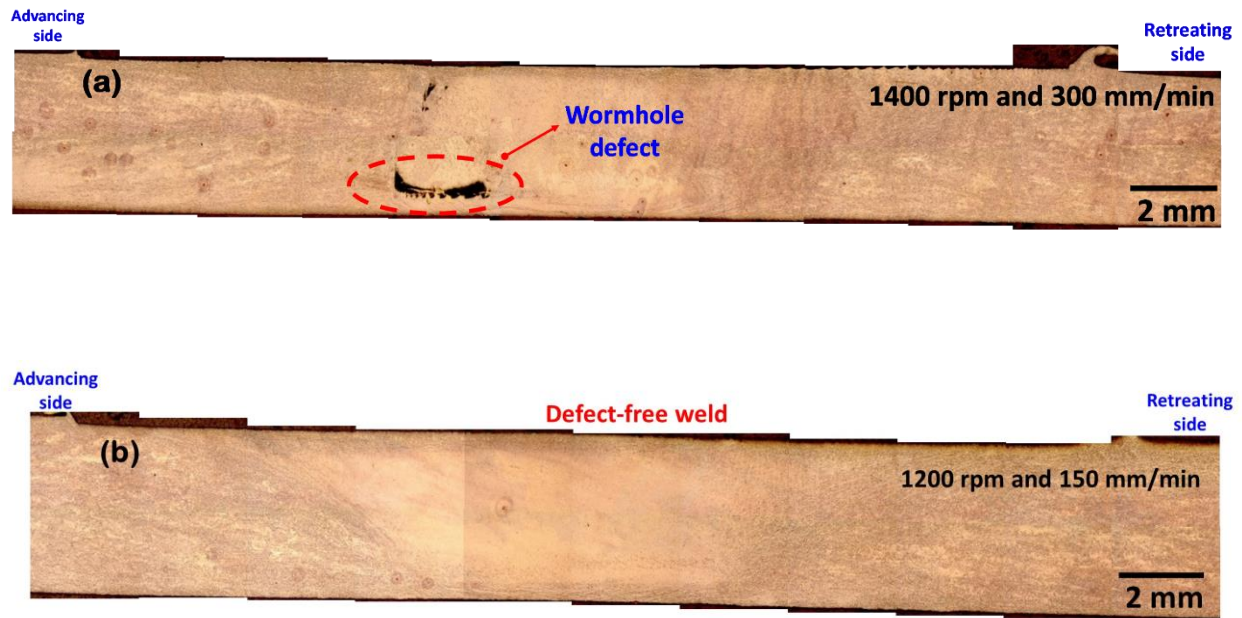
Two welds performed using different welding parameters. (a) 1400 rpm and 300 mm/min; and (b) 1200 rpm and 150 mm/min.
